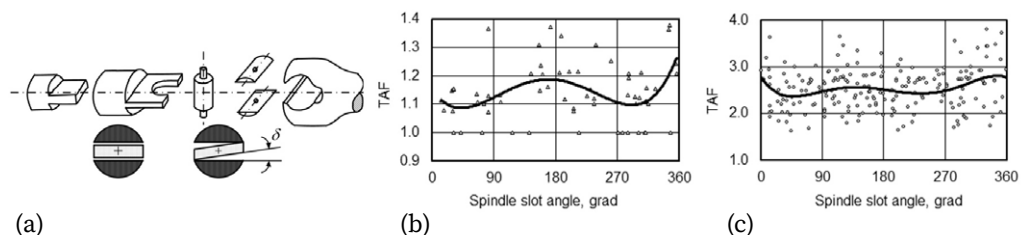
(a) Design of spindle with slip pads; TAF measured by the spindle slot angular position in two different drivelines: (b) with two gearboxes;
